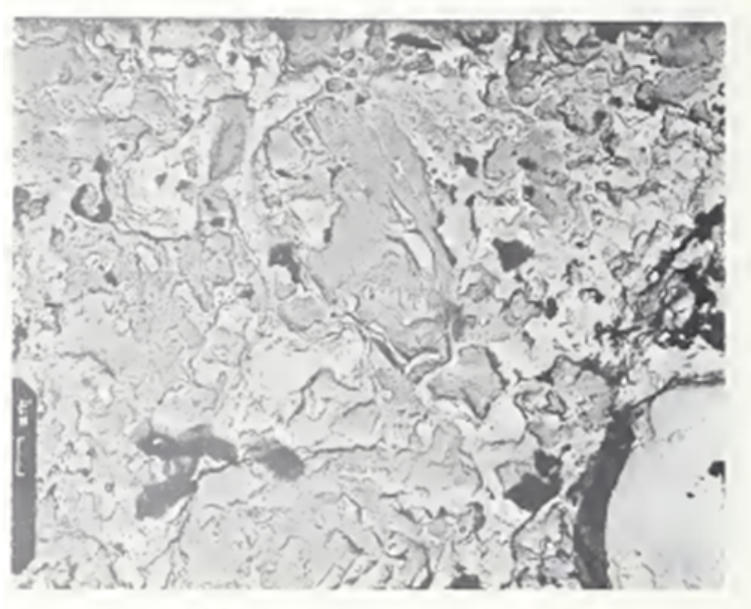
Uniform Corrosion of a 7178-T6 aluminum failed wing plank (Ballard, 1968)
